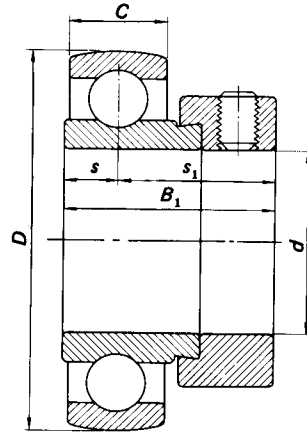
Bearing with eccentric locking collar – Narrow overall width
